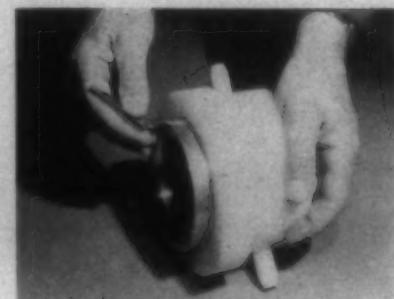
Large clearances can be used with nylon bearings. Whereas large clearance can lead to peening and other damage in metal bearings, plastic bearing material, Turbo points out, will absorb impacts and resist peening much better.
